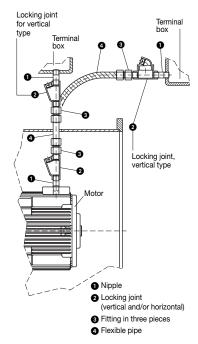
Cable exit with "Conduit" for Gas and Dust
